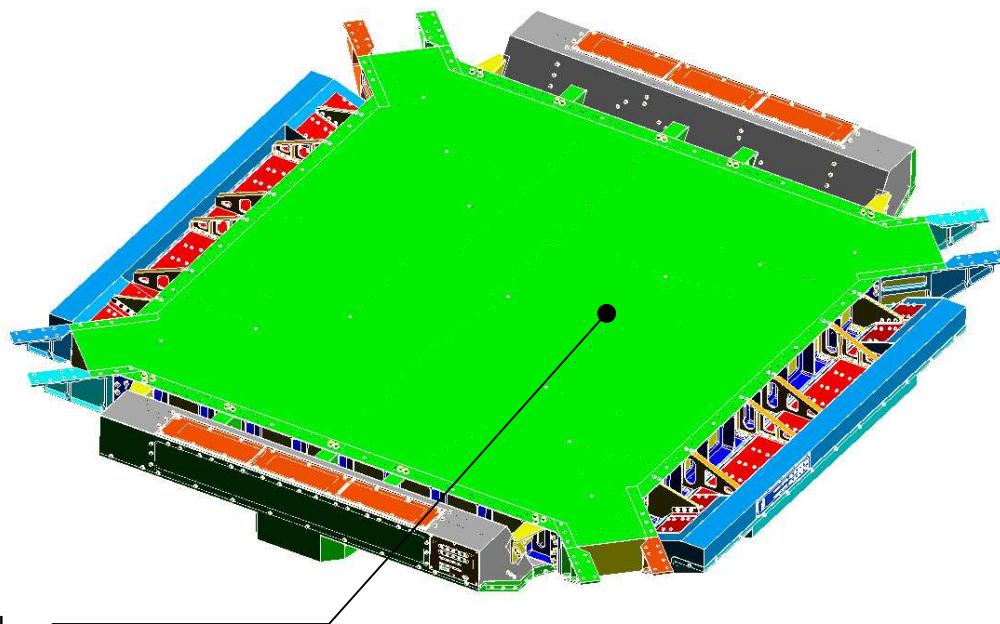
UTOF assembly, with the honeycomb panel (green)
